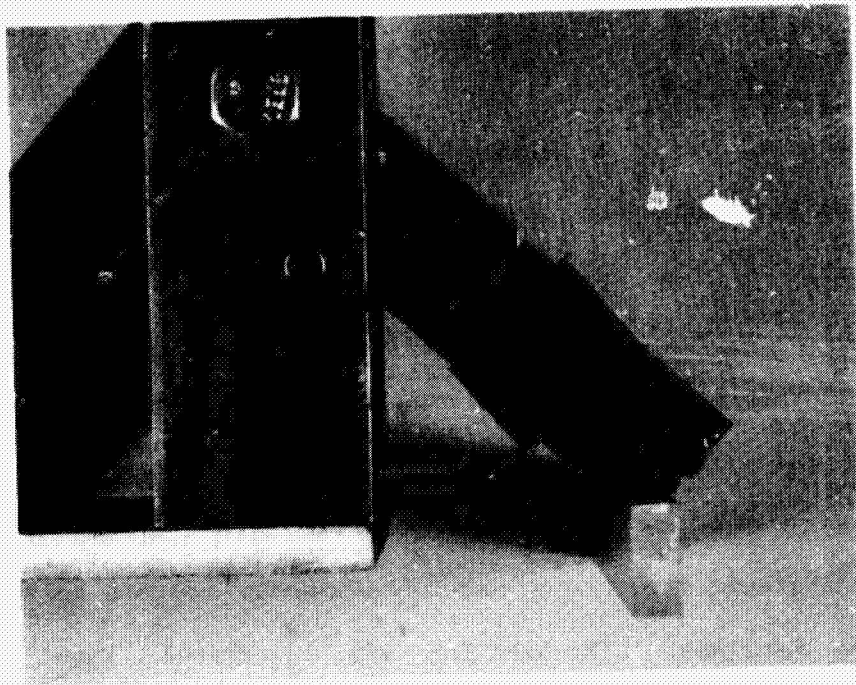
Notch Crack Initiator Apparatus For Single-Edge
